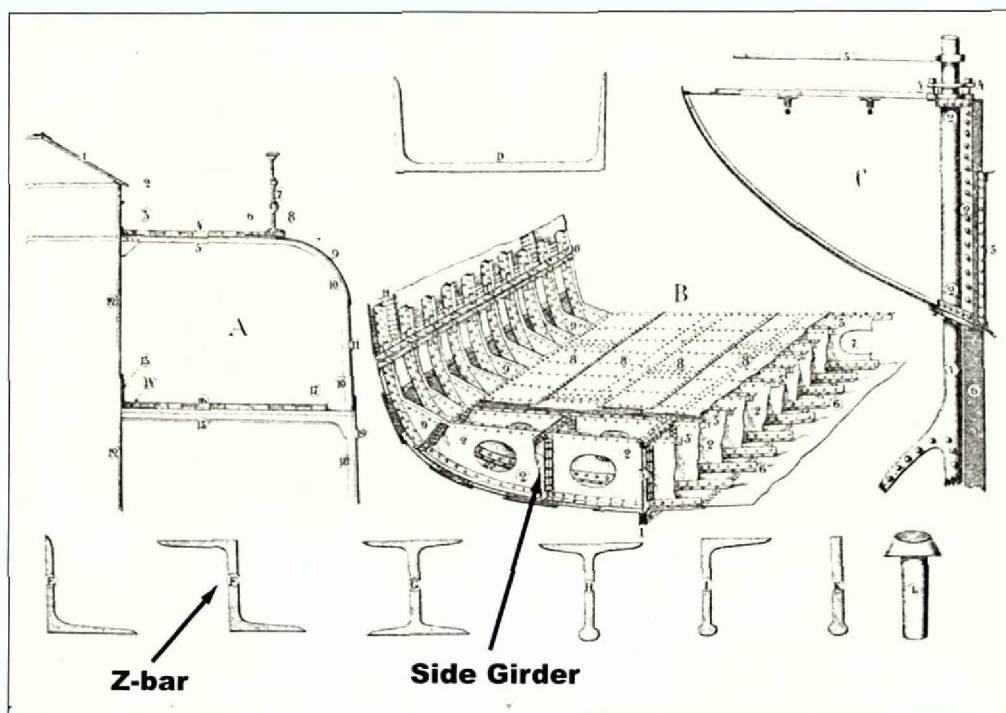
Illustration showing side girder framing and Z-bar like that found on SS16B (after Paasch 1890 Plate 29)
